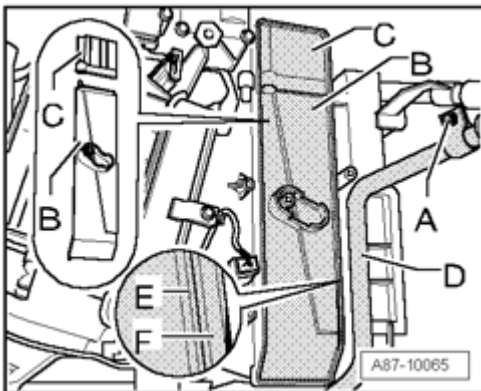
Identifying Bolts, Coolant Pipe, Housing Wall, Parting Line, And Flange
